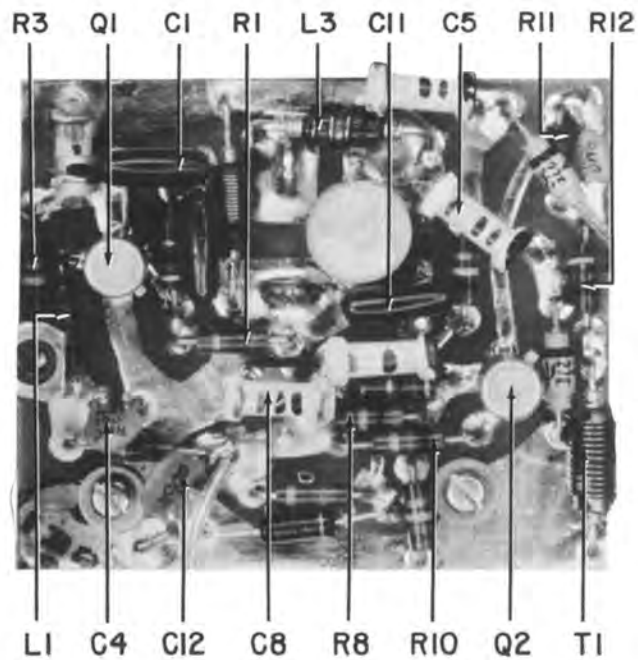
Type 13709 Oscillator/Buffer, Component Locations
